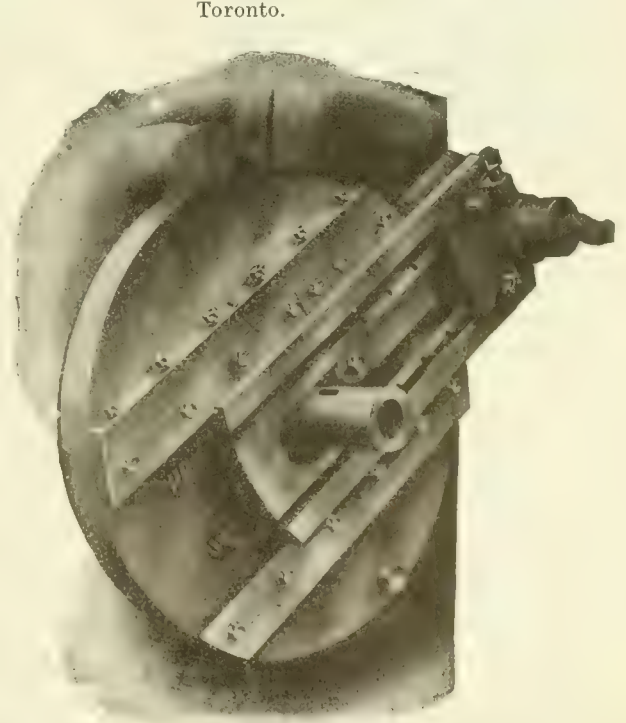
THIS TYPE OF FACING SLIDE IS USED ON PATENT MACHINE.
